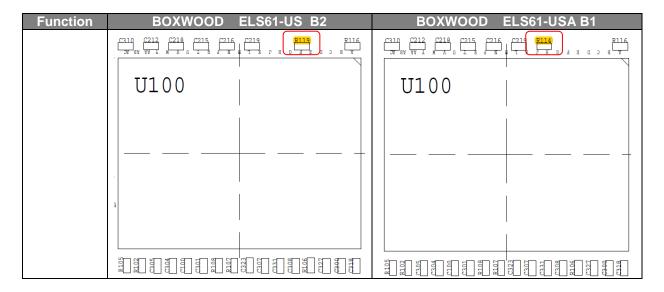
ELS61-USA B1 faceplan assembly parts top view
